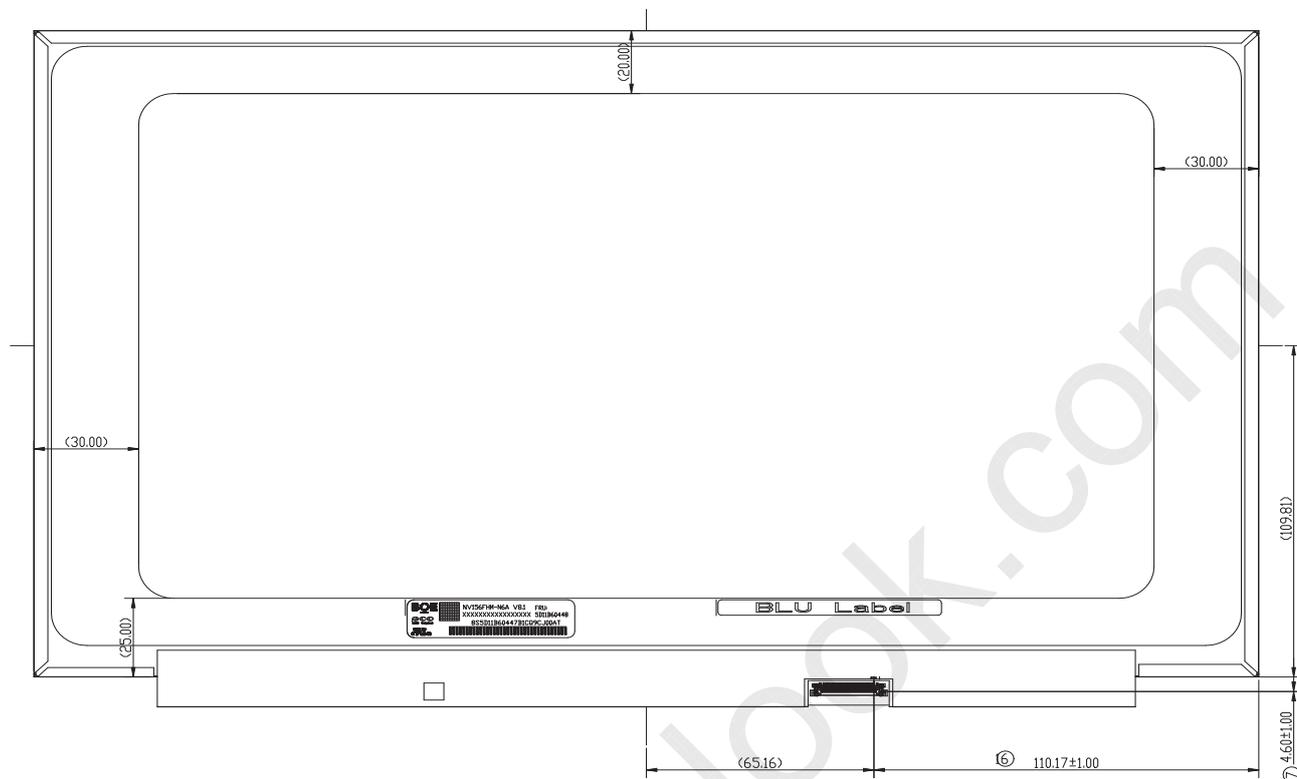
TFT-LCD Module Outline Dimensions (Rear view)
